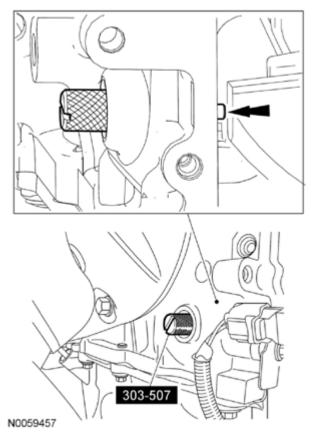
Locating Crankshaft TDC Timing Peg (303-507) Courtesy of FORD MOTOR CO.
